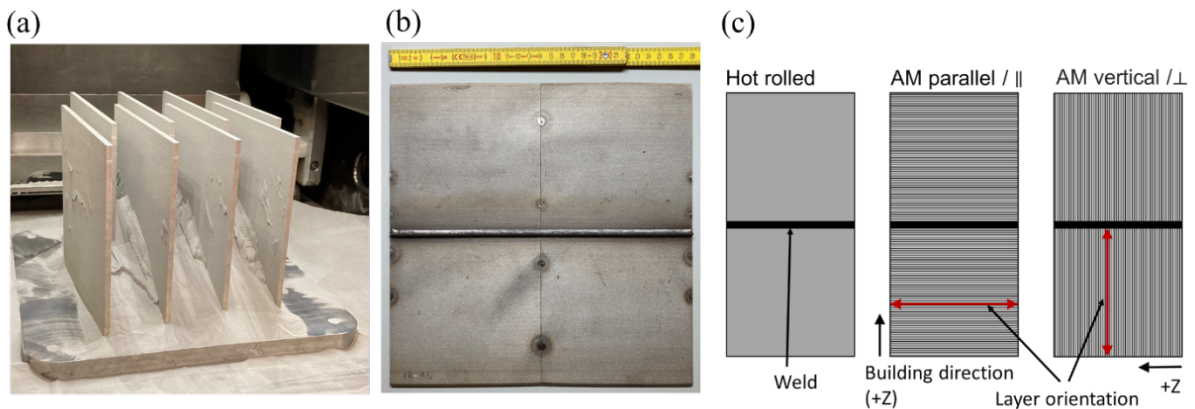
(a) LPBF manufacturing of plates; (b) Specimens joined from four LPBF plates; (c) Investigated conditions.
